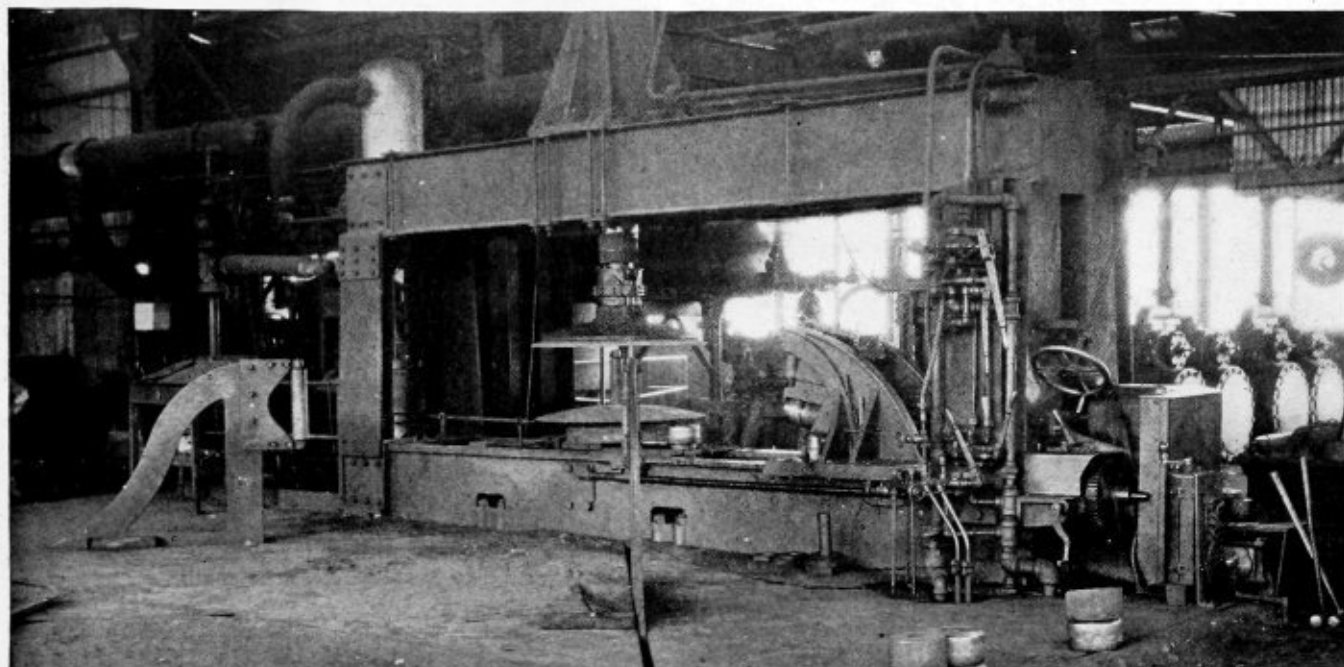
Circular Spinning Flanging Machine with Dies in Position for the Dishing Operation
